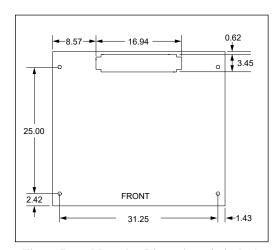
Mounting Dimensions (in inches) For SS4Cxxx Models
